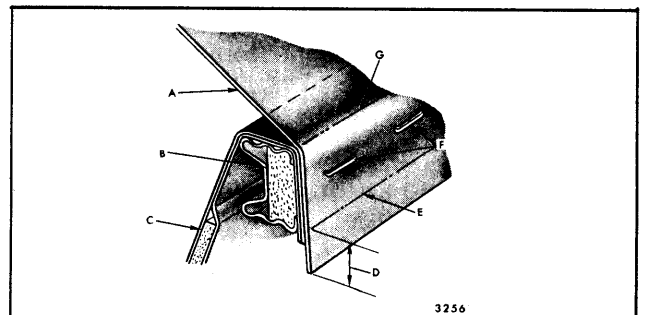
Cross Section at Rear Trimstick - "A, B & C" Styles
